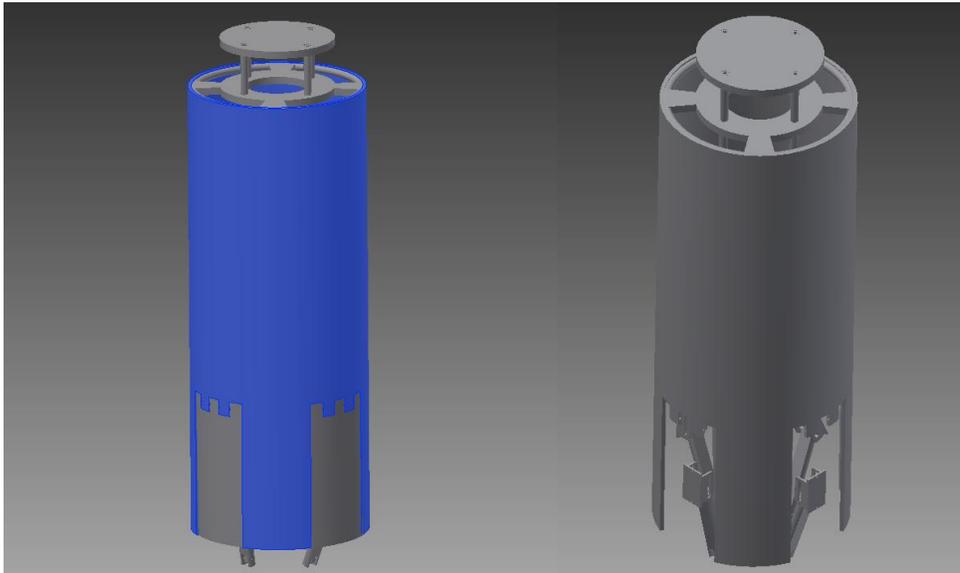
CAD drawing of the current four-panel air-brake, showing the rocket with and without the brake panels.
